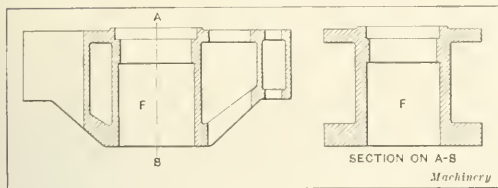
Bed Casting designed with Hole F to receive Cylinder
